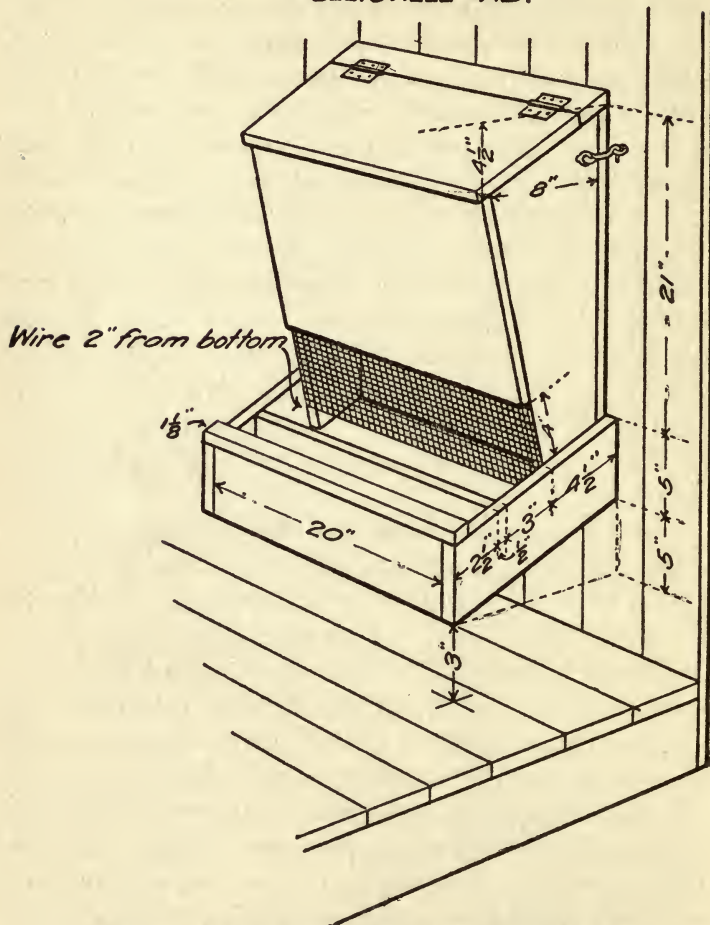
WALL TYPE OF DRY MASH FEED HOPPER
